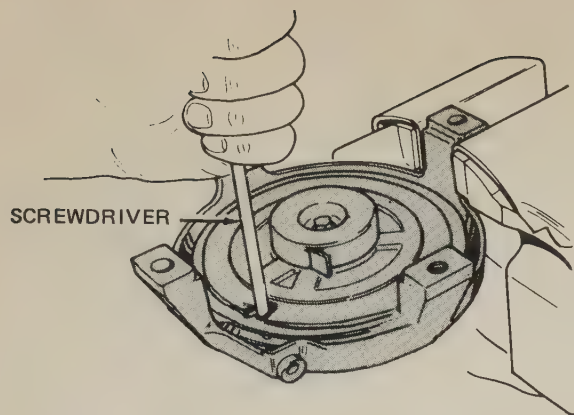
On some starters, you can wind up the recoil spring with a screwdriver.
